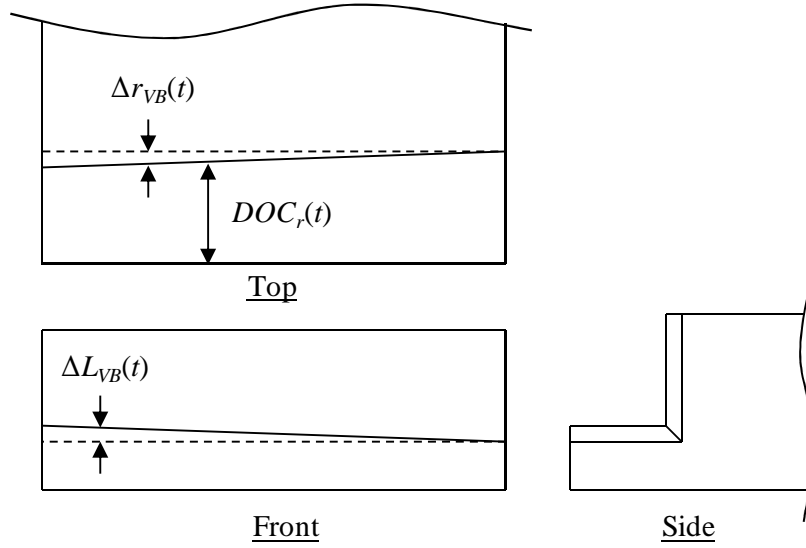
Top, front, and side views of a machined pass showing changes due to tool wear.
